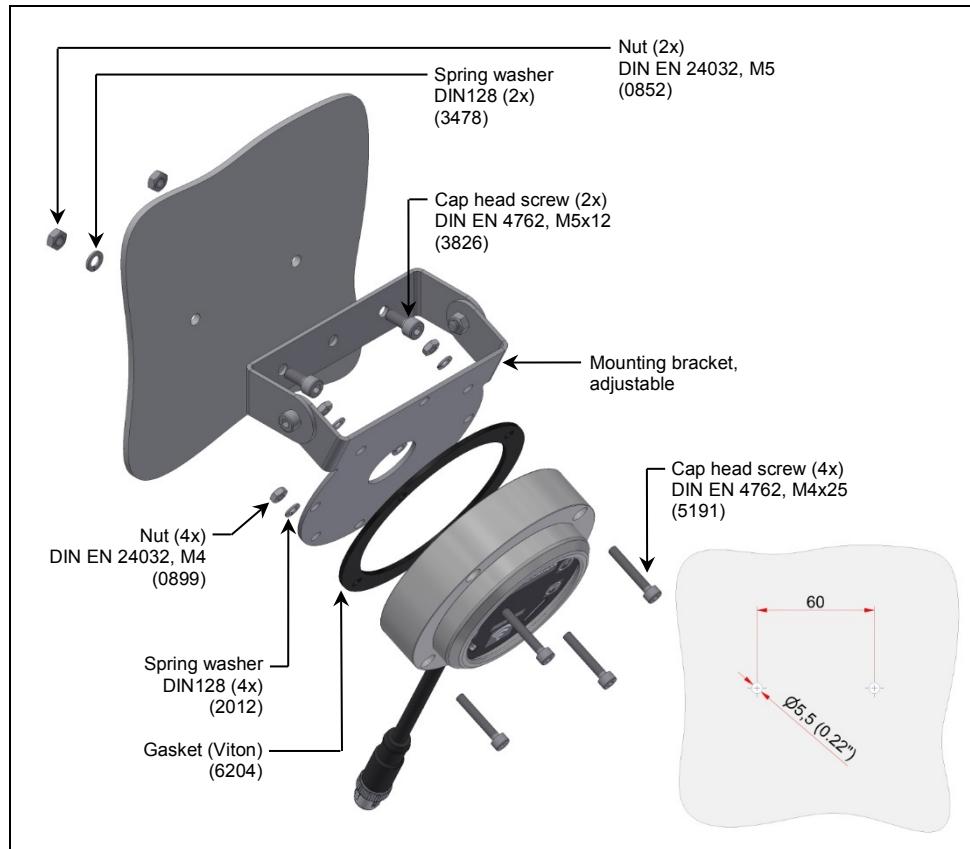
Mounting RWR95.51-R-SP/DP with Mounting Bracket
